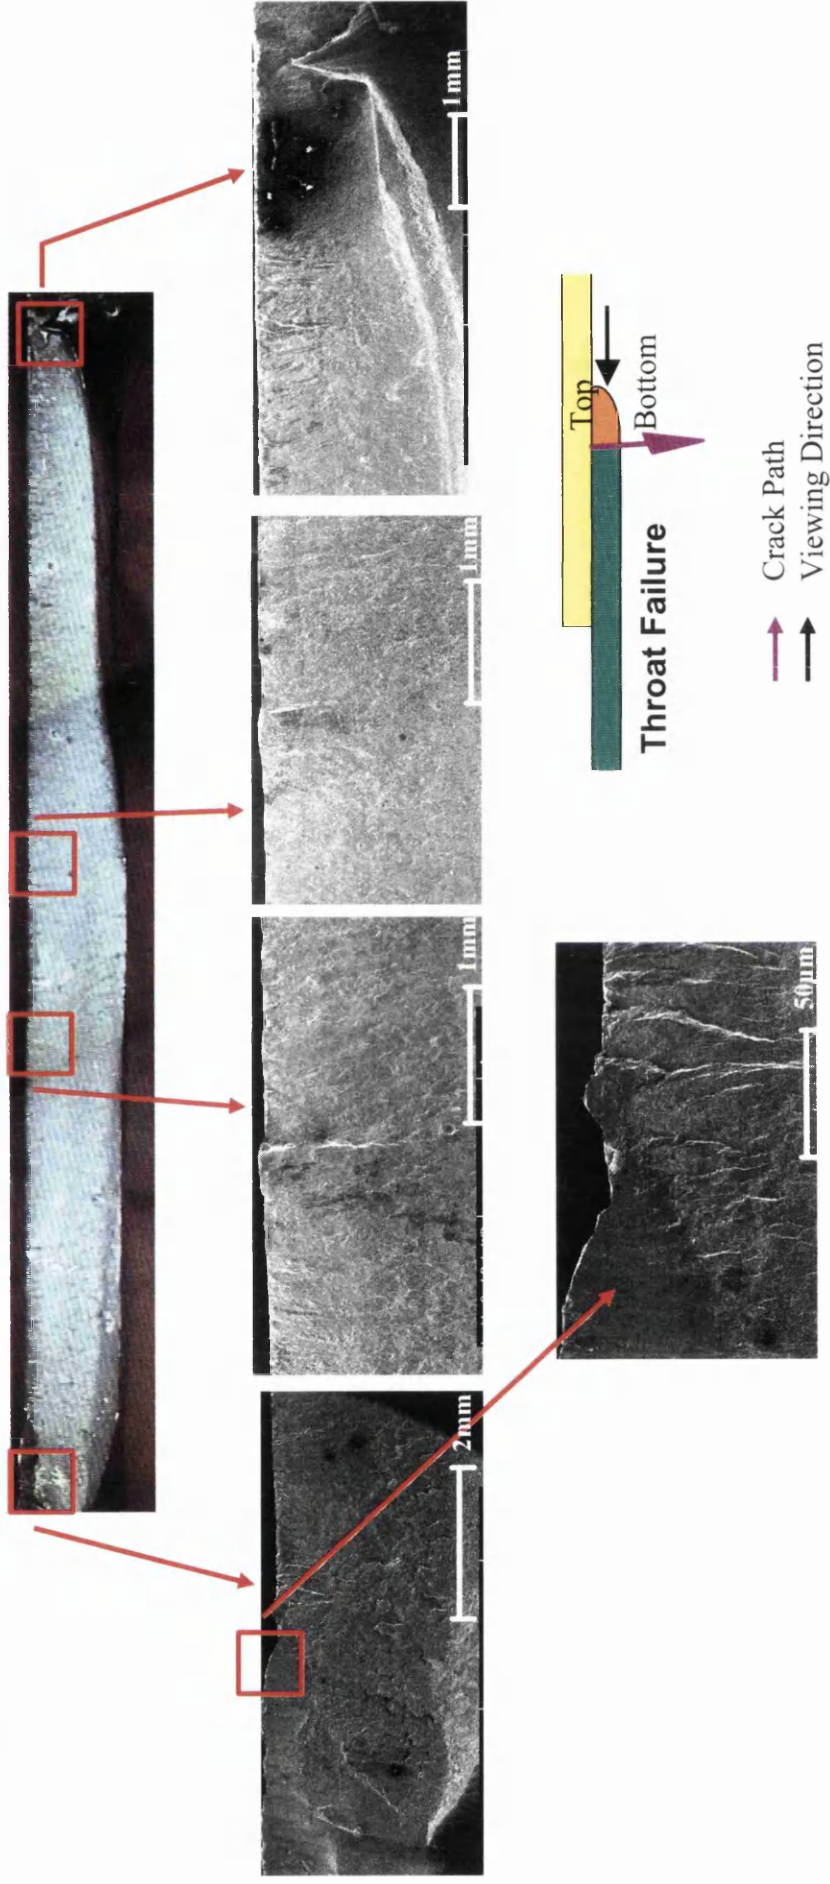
Typical Fracture Surface for GM1 Weld Throat Failure – Sheet View
